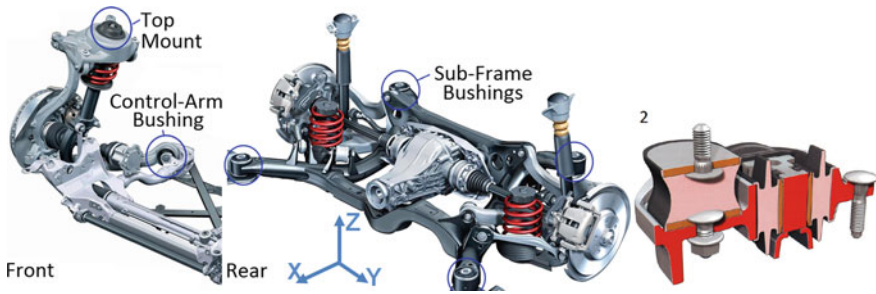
Position of several elastomer bushings within vehicle and cross-sectional view of gearbox mount (right)
